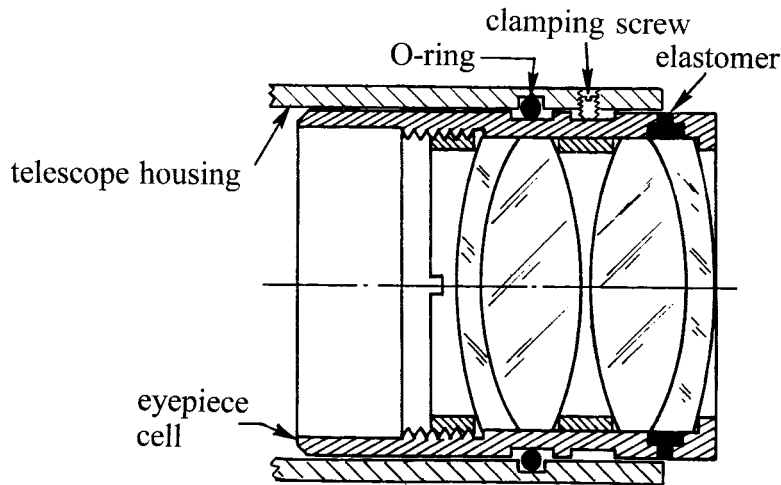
Example of a fixed-focus eyepiece for a military telescope with lenses and mechanical parts premachined and assembly by the “drop-in” technique. (Adapted from Yoder, P.R., Jr. 1993. *Optical Systems Engineering III, SPIE Proc. Vol. 389*, Taylor, W.H., ed., pp. 2–11.)
